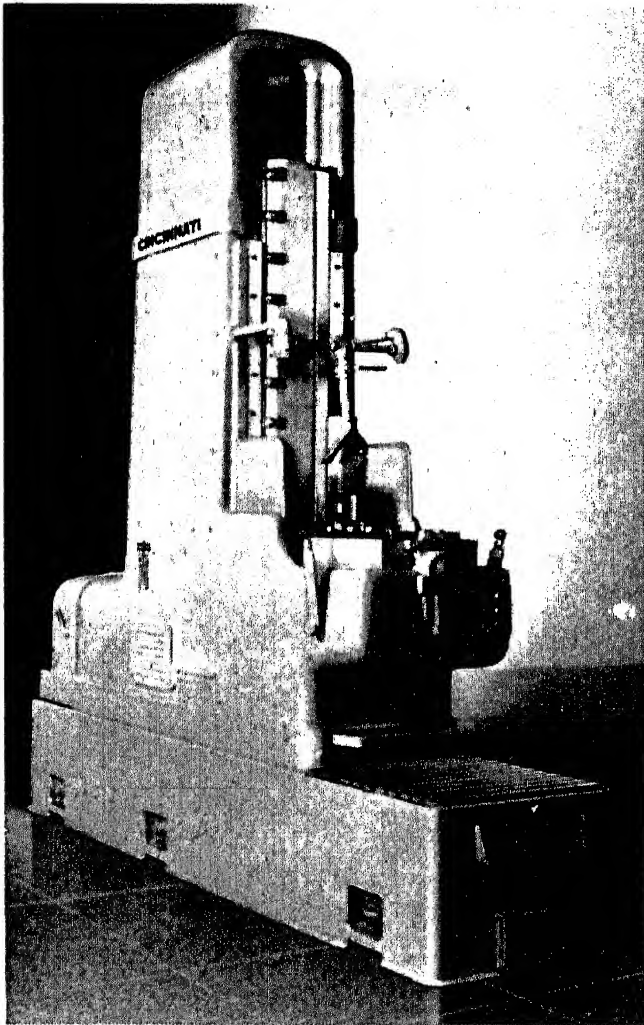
A 3 ton vertical single ram surface broaching machine with 48 in. stroke. (Courtesy The Cincinnati Milling Machine Co.)
